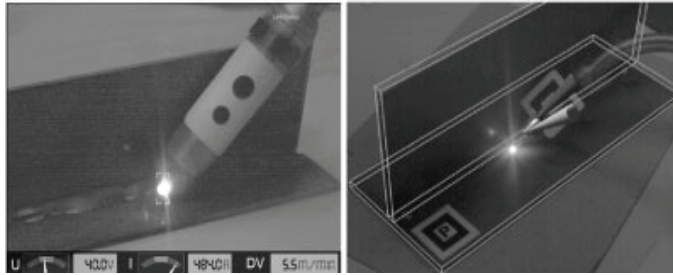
Using AR in welding process-a user interface of welding helmet system (Hillers et al., 2004)
